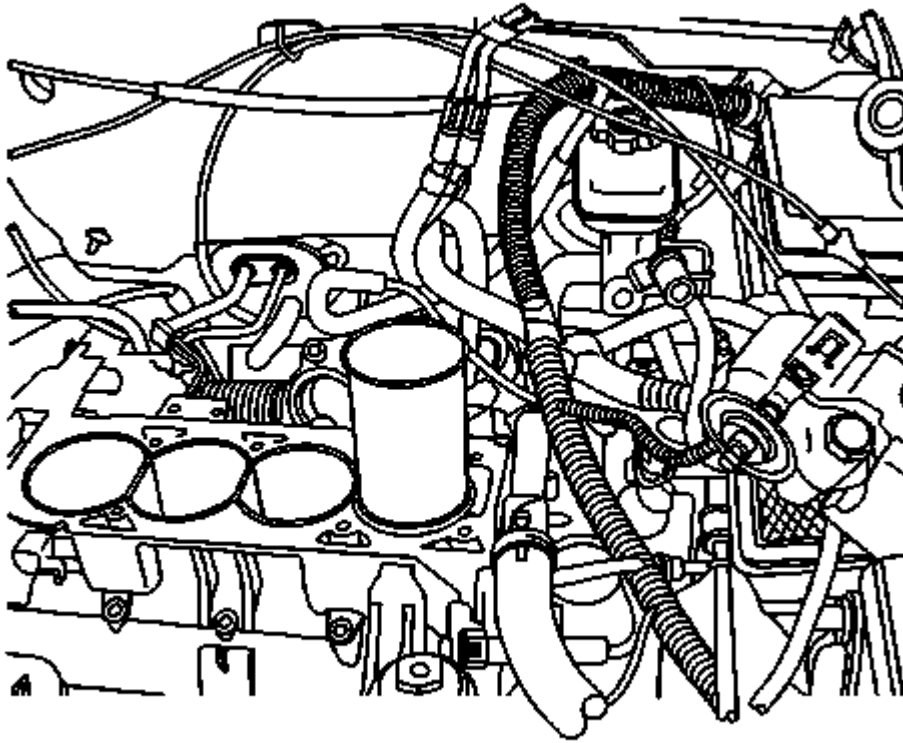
Removing Cylinder Bore Liner From The Engine Block
